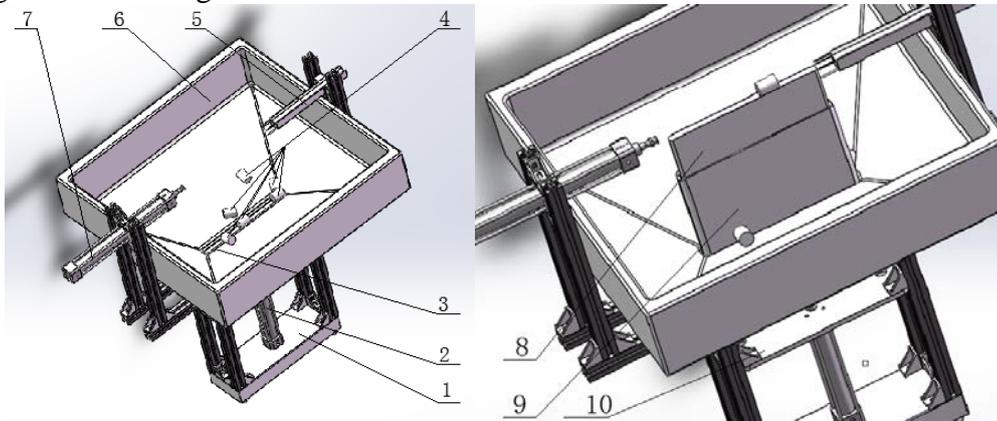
In Plate Type Separation Feeding Device Figure2. Three-Dimensional Model of Chain Plate
